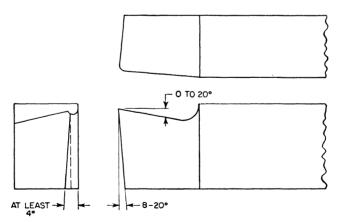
Tool angles for turning aluminum or zinc die castings with a carbon-steel tool.
